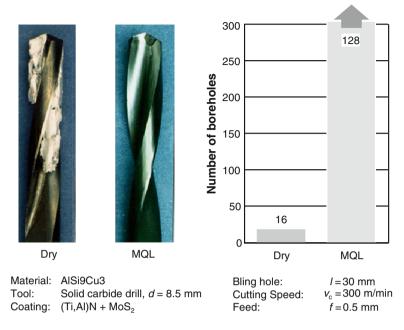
Drilling of aluminium with and without minimum quantity cooling lubrication
